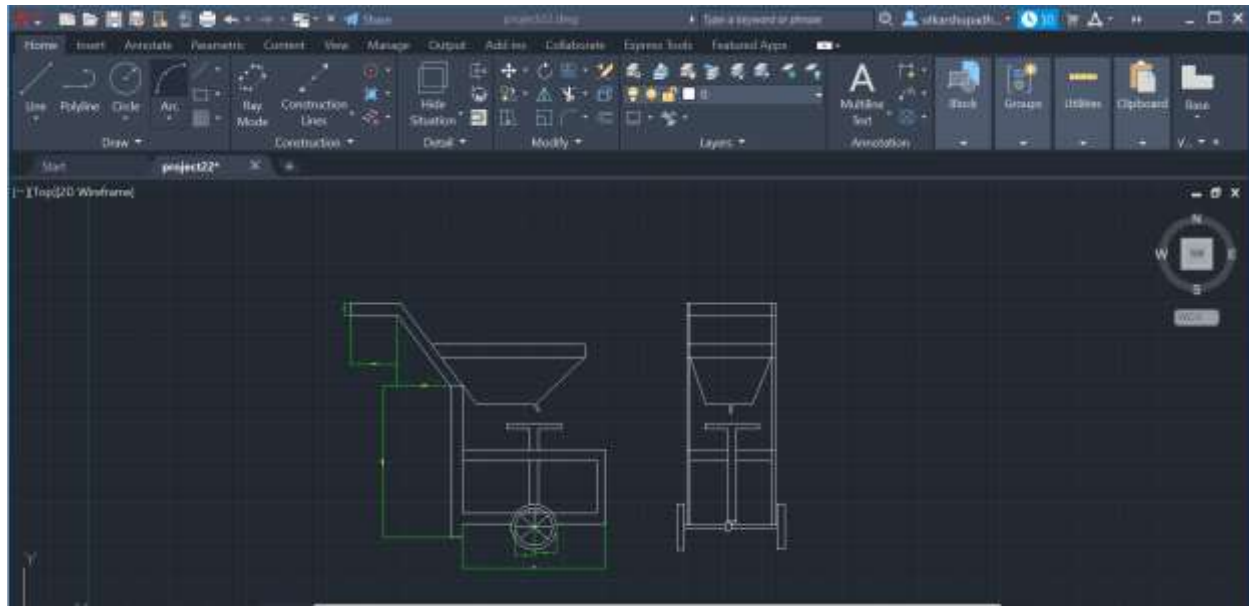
D CAD Model of Bevel gear-based spreading machine.
